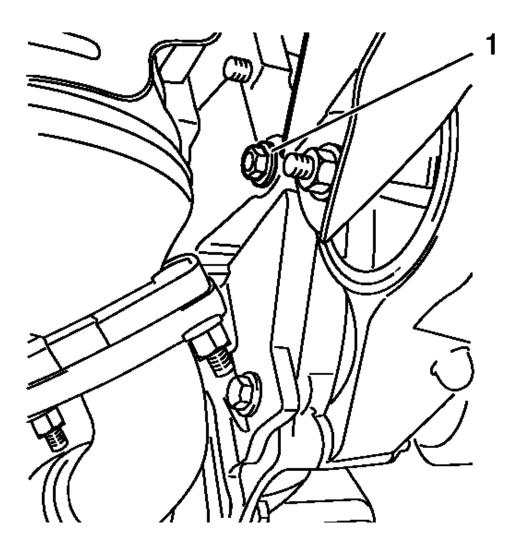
View Of Bolt Courtesy of GENERAL MOTORS CORP.
